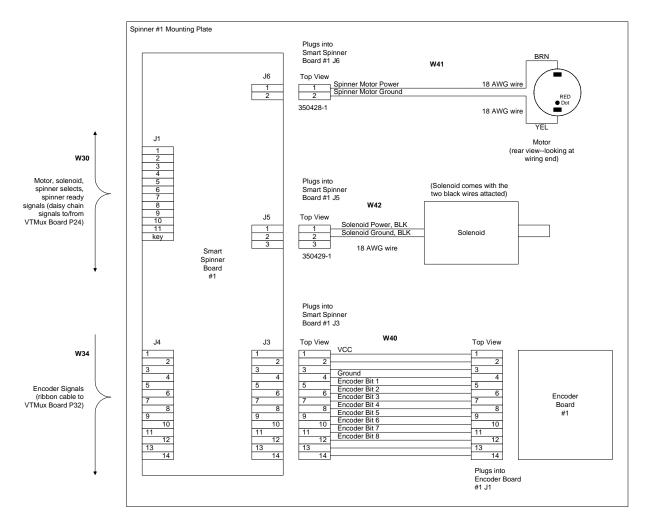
SPINNER #1 SUBASSEMBLY W40 SPINNER BOARD #1 J3 TO ENCODER BOARD #1 J1 W41 SPINNER BOARD #1 J6 TO SPINNER MOTOR W42 SPINNER BOARD #1 J5 TO SPINNER SOLENOID
